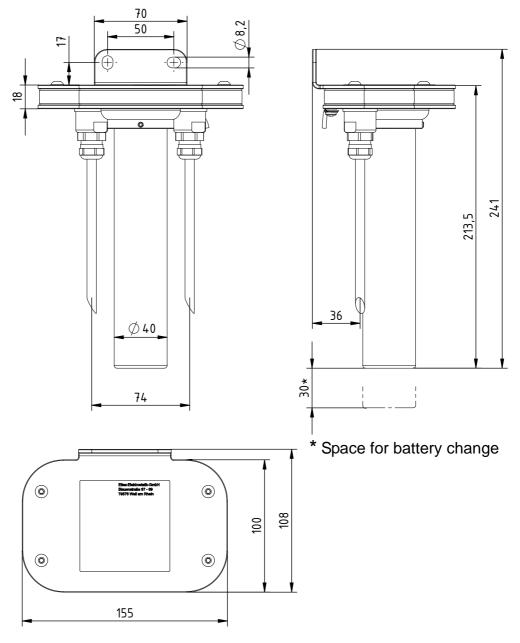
Mounting Dimensions TERRALIGHT
